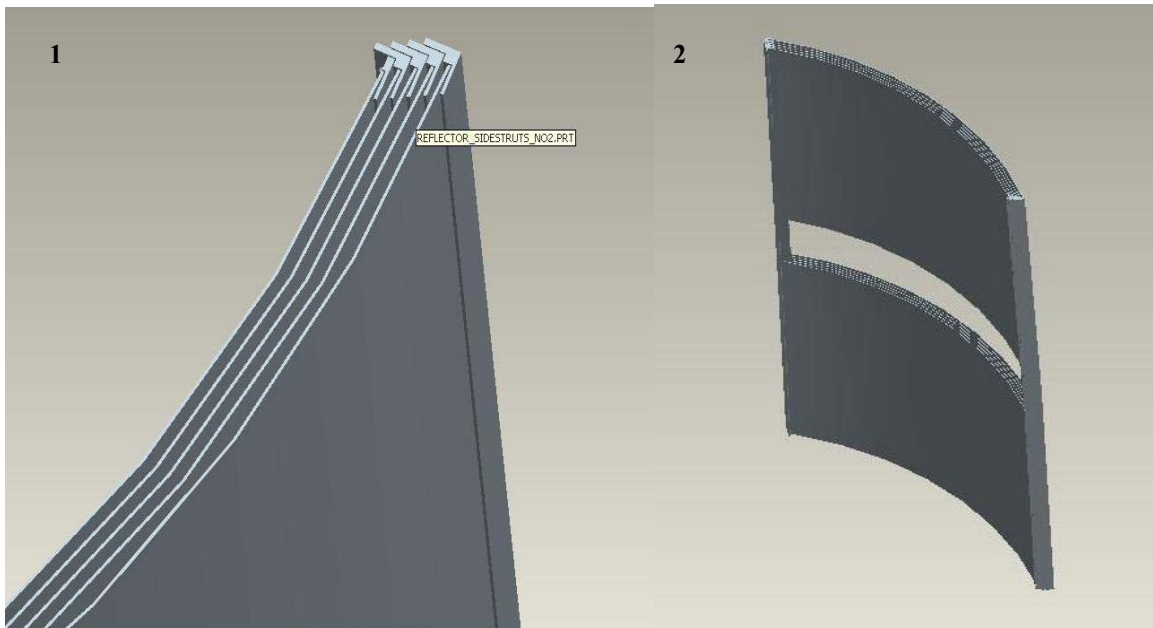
Individual Support Strut GRA Assembly w/ Alignment Step
